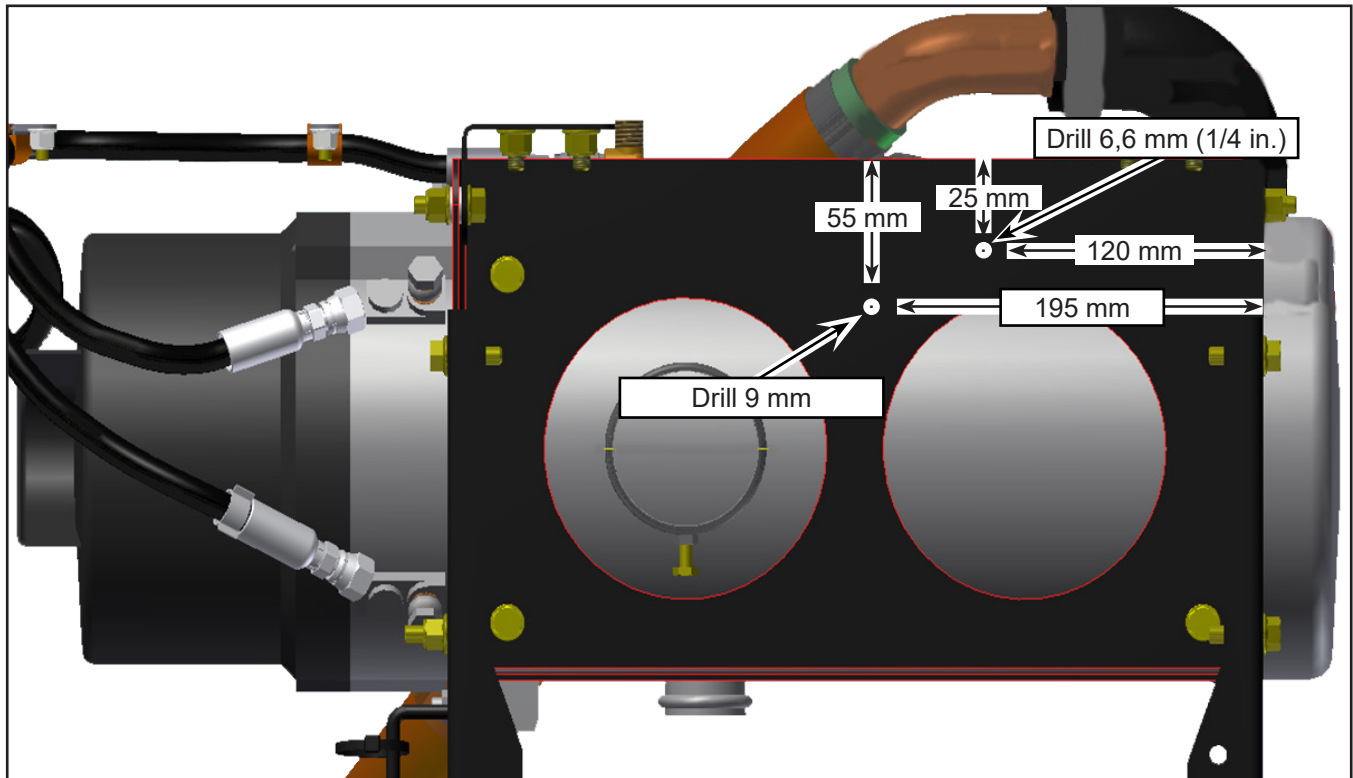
Drill the Two Holes in the Cradle (Bottom View)
